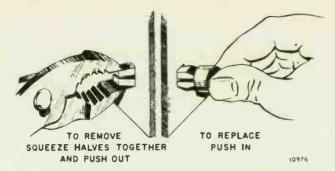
Method of Removing and Replacing Nylon Insulating Inserts.
